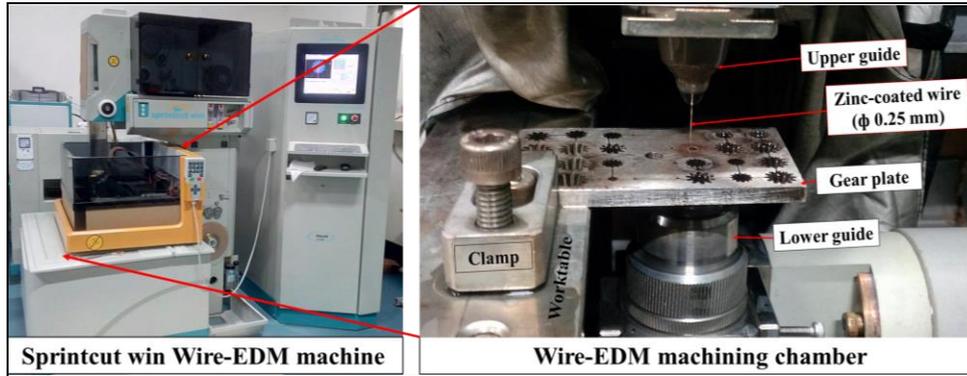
Wire-EDM machine tool used for this study and enlarged view of machining chamber during cutting of miniature ratchet gear
